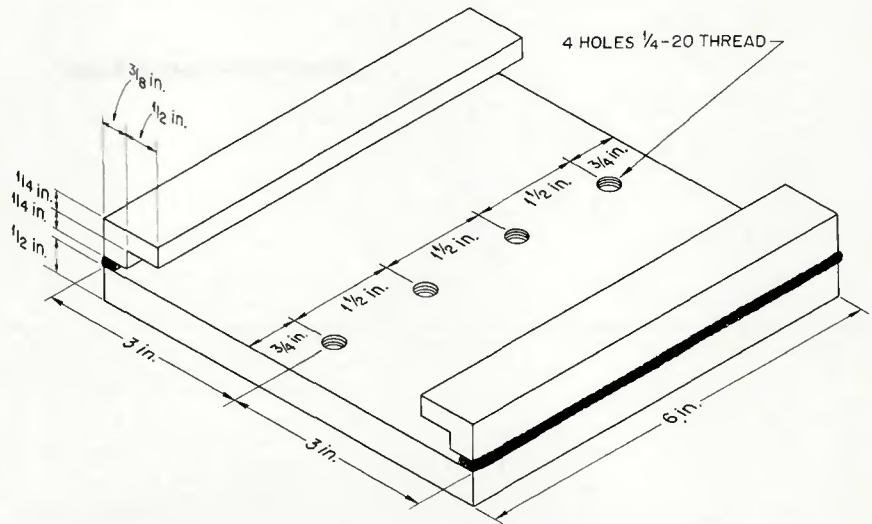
Dimensioned drawing of the three-point-loaded, bent-beam test apparatus
